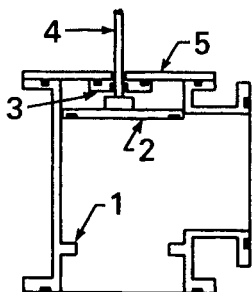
Components of a simple elastomer sealed valve: (1) Valve seat; (2) valve plate; (3) bonnet; (4) stem; (5) stem seal.
